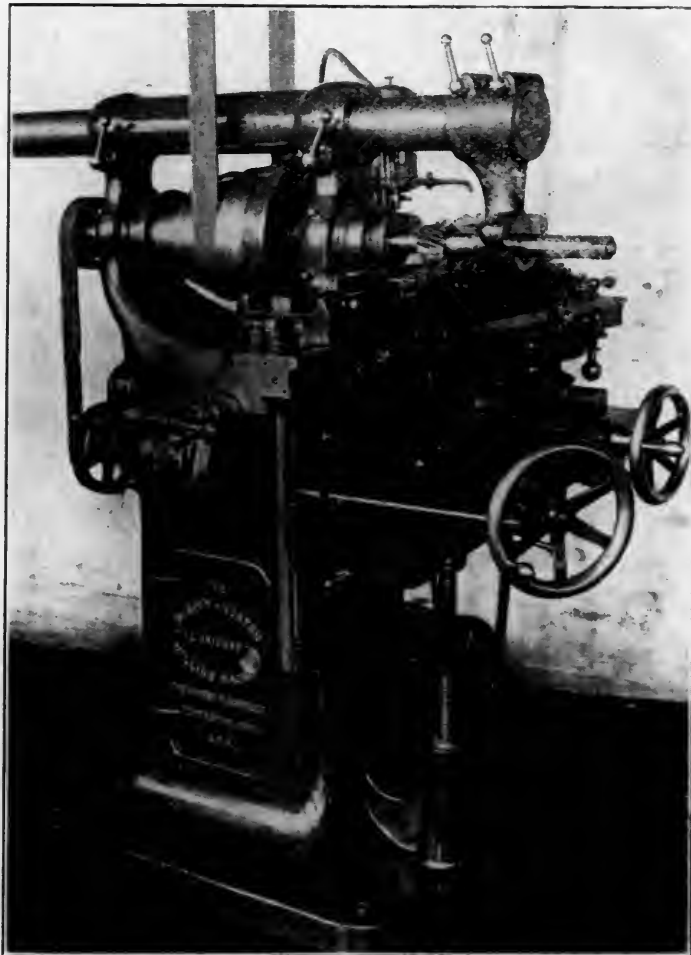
VIEW OF THE HENDEY-NORTON MILLING MACHINE, SHOWING CONVENIENT ARRANGEMENT OF THE SPEED-BOX IN THE FRAME AT THE LEFT.
